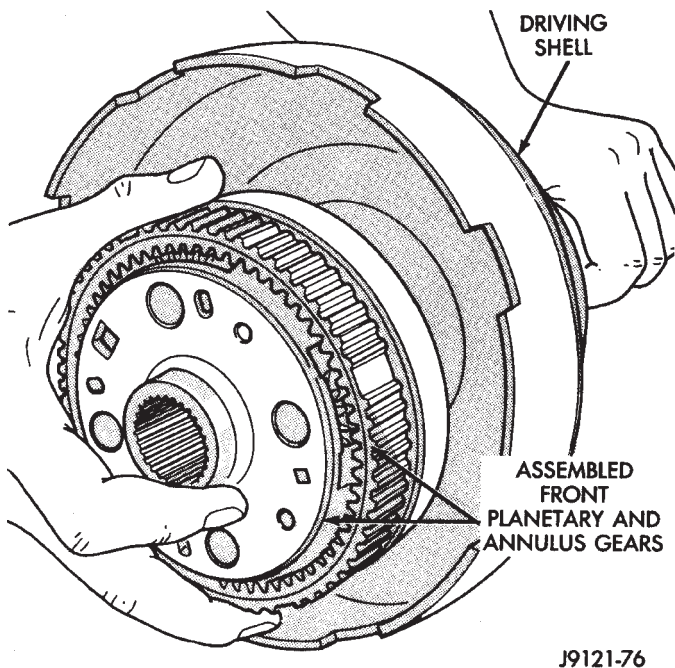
Installing Front Planetary And Annulus Gear Assembly—46RH
